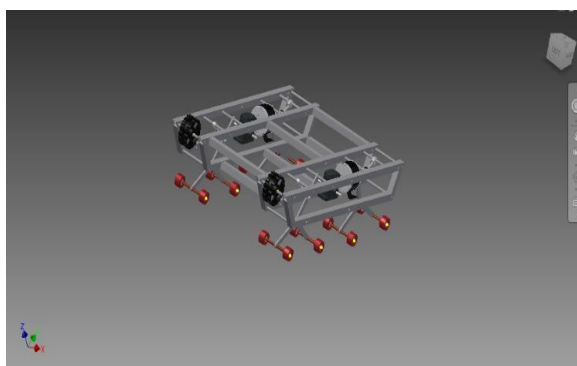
FINAL CATERPILLAR CHASSIS ASSEMBLY ISO VIEW
